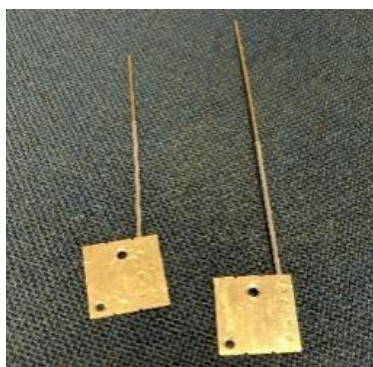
Aluminum plates and the welded aluminum wire coated with Teflon®.
